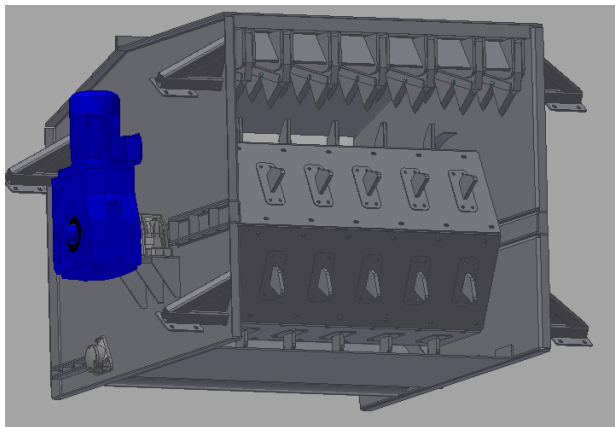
A bag opener and large-size waste shredding (bottom view with a hidden gear cover)
